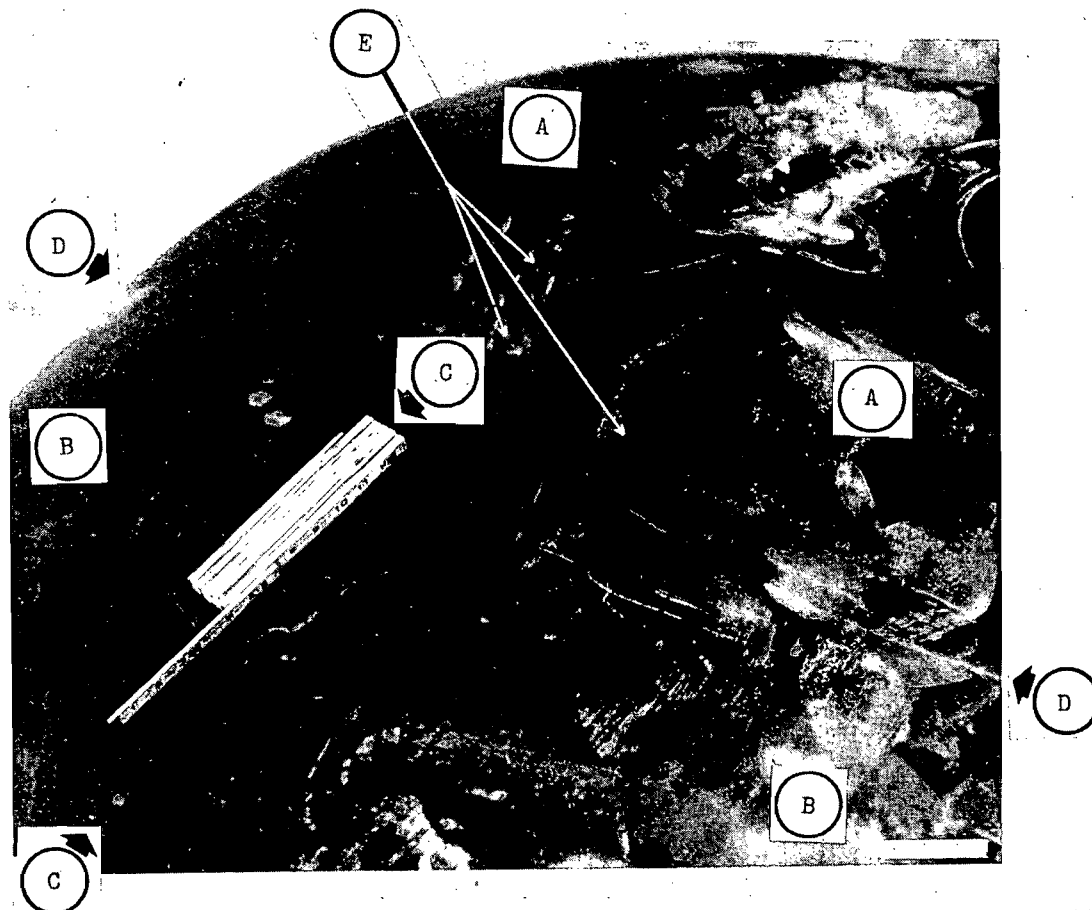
Rupture in head material (A), and shell material (B), to left and rear of manway. Circumferential head-to-shell weld area (C), and longitudinal shell weld area (D). Longitudinal scratch pattern (E).
